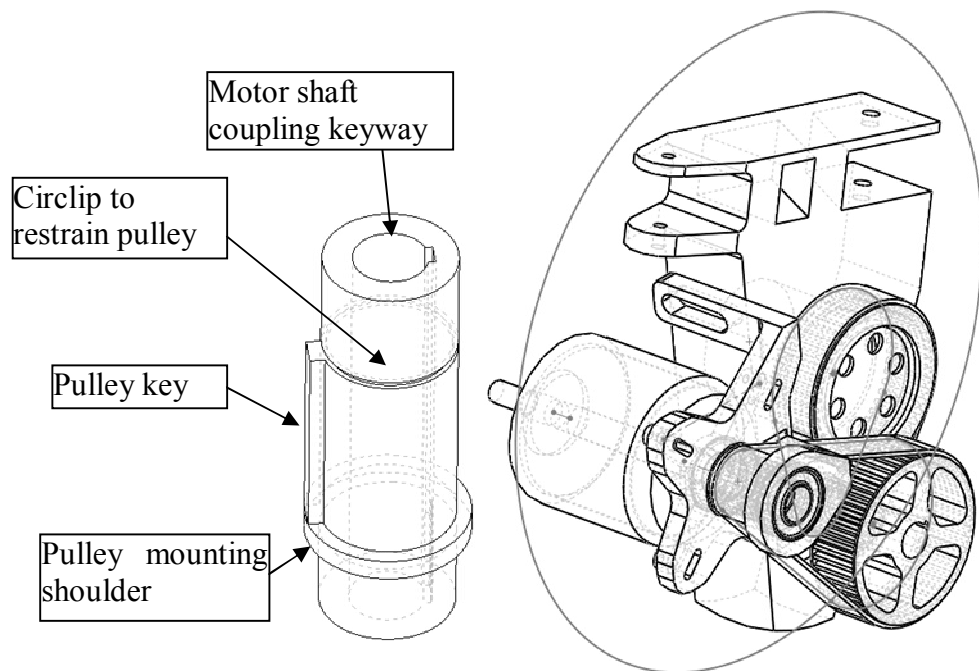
Optimization of the two stage design to reduce weight and the bending moment on the motor bearings.
